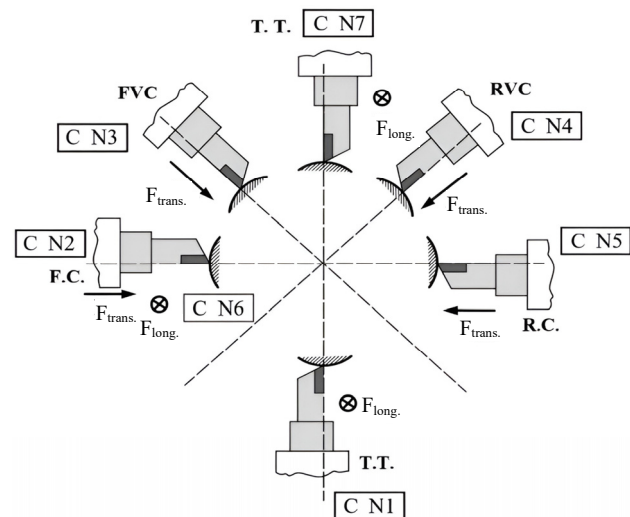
Multi-tool multi-carriage adjustment on automatic machines with two vertical carriages and longitudinal feed of the front carriage
